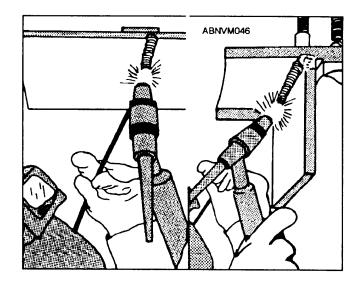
Making overhead multipass groove and fillet welds.
